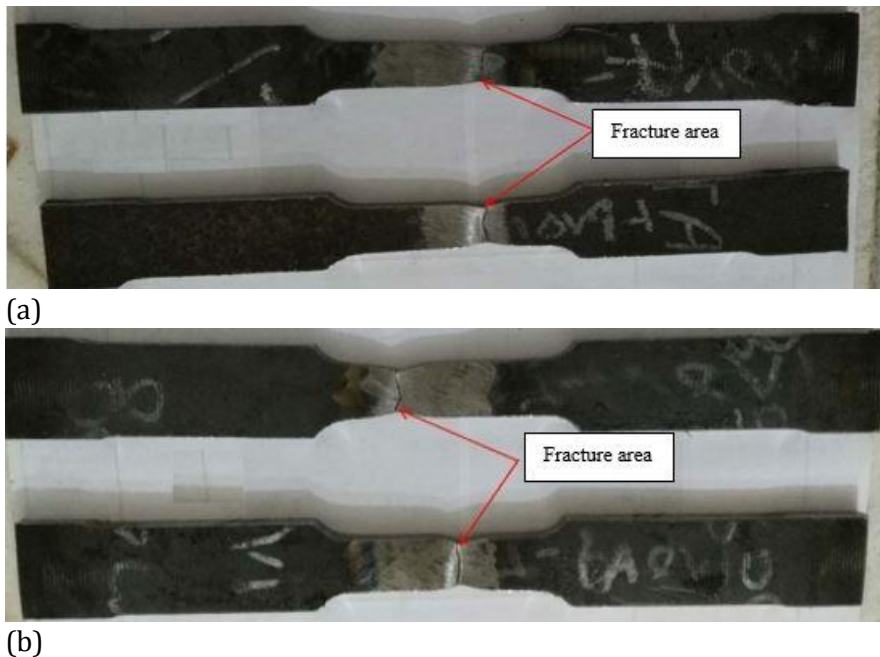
Fracture region of the transverse tensile weld samples, a) Samples H1, b) Samples H2.
